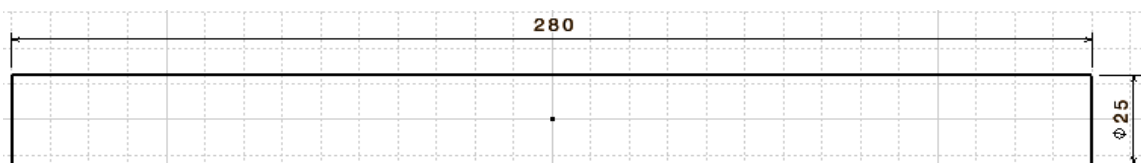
2D CATIA drawing of cylindrical specimen
